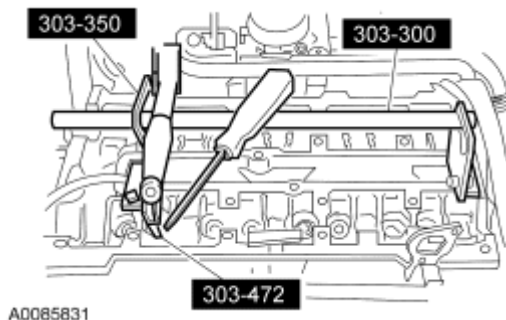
Identifying Special Tools (303-300, 303-350, 303-472)
